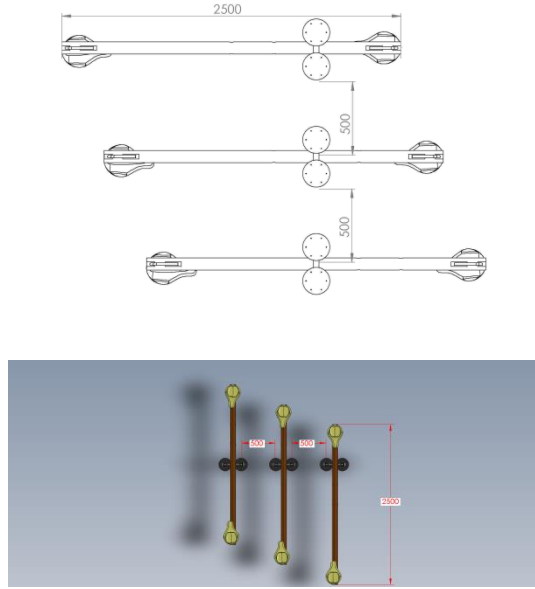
Top View of Lever Seesaw (All dimensions are in mm.)
